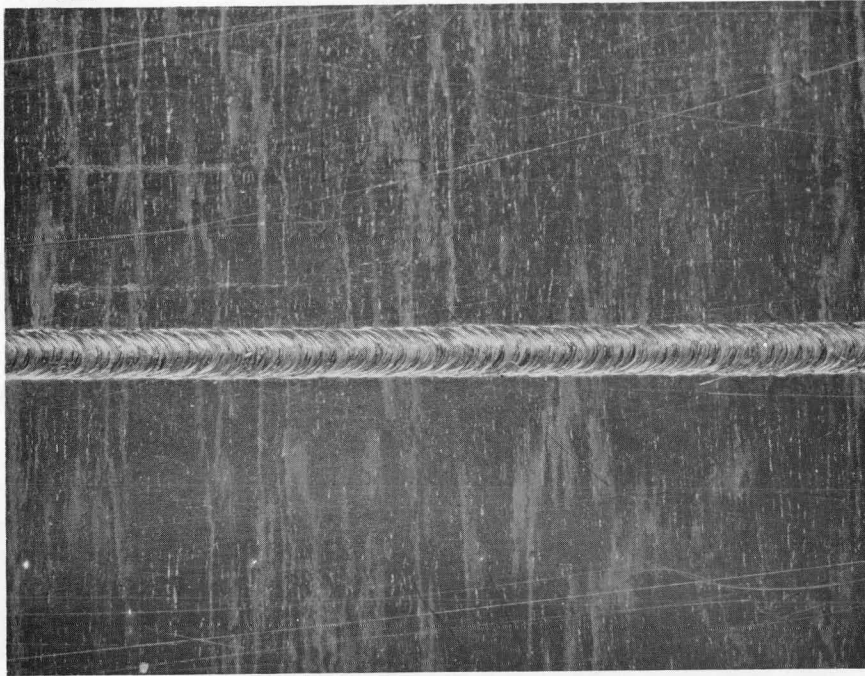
TIG Weld Bead on V-15Cr-5Ti Sheet
